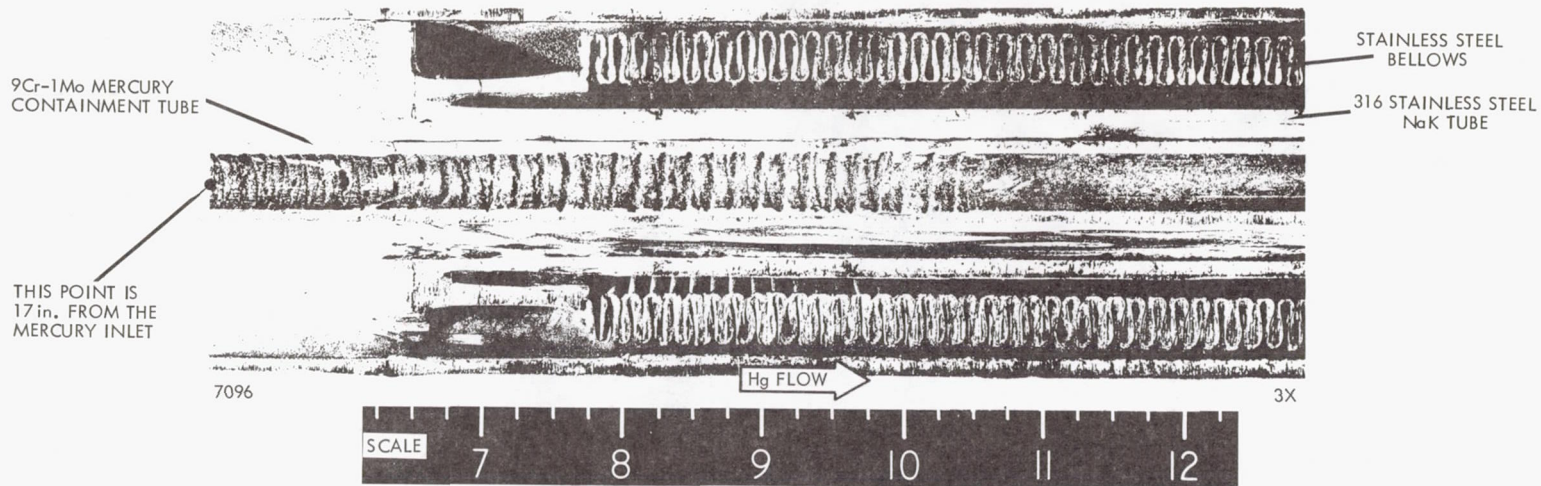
PHOTO MACROGRAPH - CL 4 BOILER INLET SECTION
